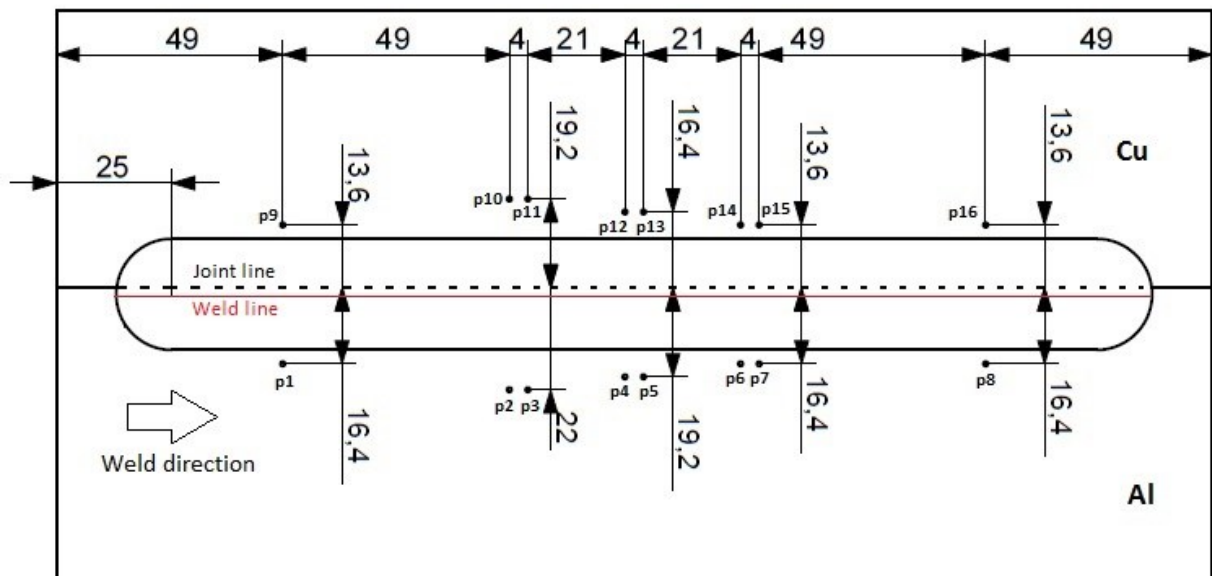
Placement of thermocouples p1-16, showing both the original joint line and the offset weld line, dimensions in mm
